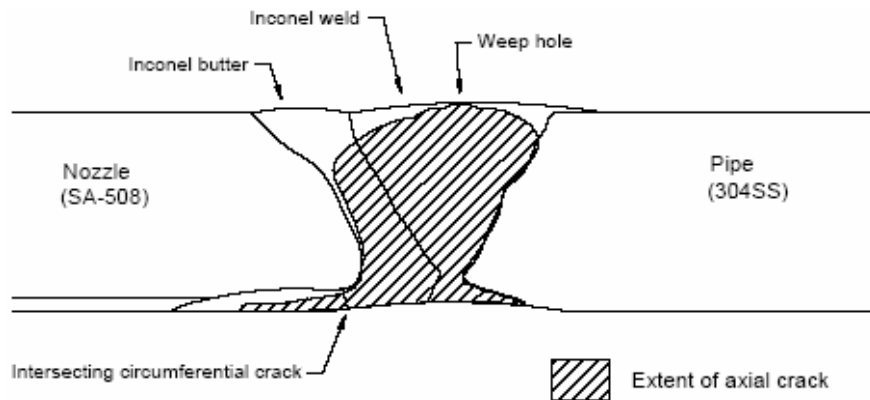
Schematic presentation of the failed safe end at V.C. Summer showing also the profile of the crack causing leakage through a weep hole (Pathania et al. 2002).
